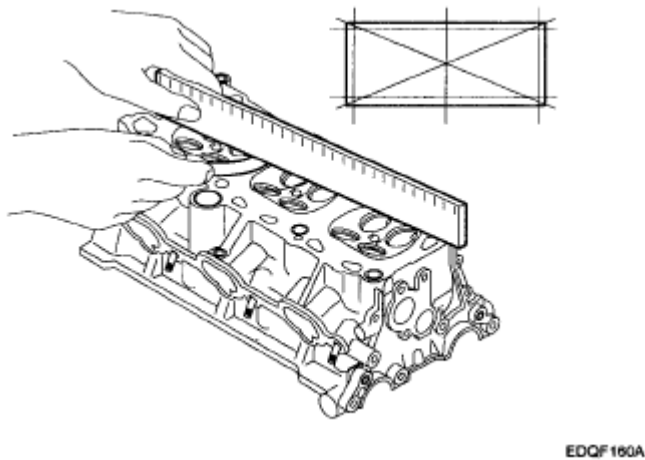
Measuring Surface Contacting Cylinder Block And Manifolds For Warpage
